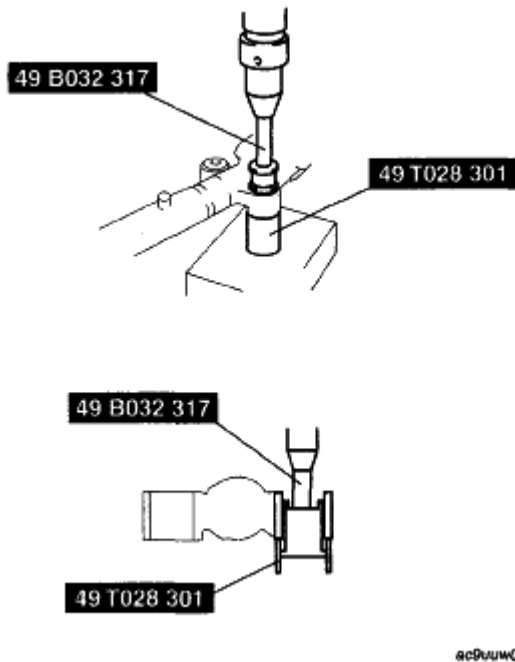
Pressing Mounting Rubber Until Mounting Rubber End Comes Out Completely From Gear Housing
